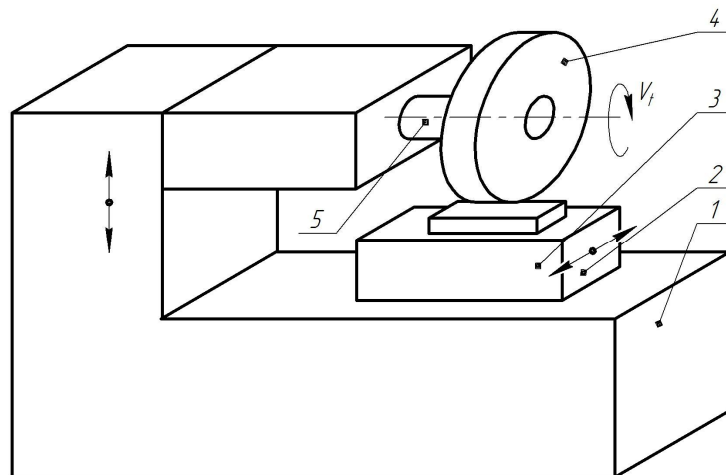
Key diagram of surface grinding machine for frictional hardening of flat surfaces.
